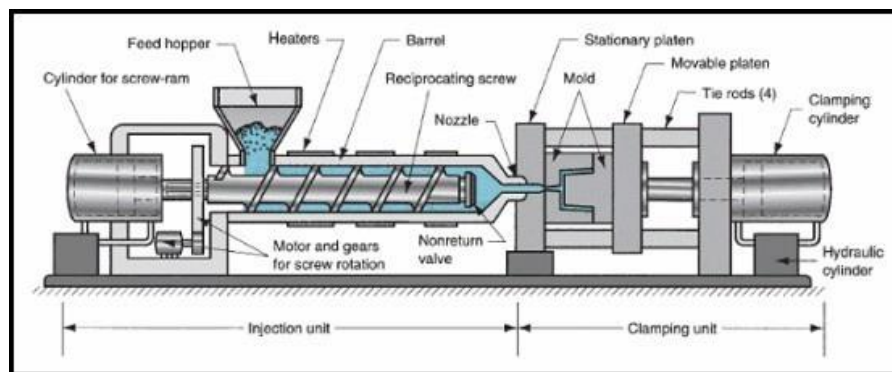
A typical scheme for injection moulding of thermoplastic parts is shown
